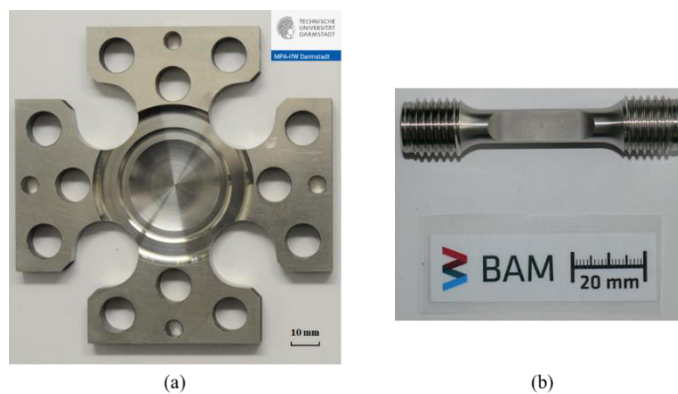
Extracted specimen after finishing process: (a) Biaxial specimen [4.1]; (b) Uniaxial specimen.
